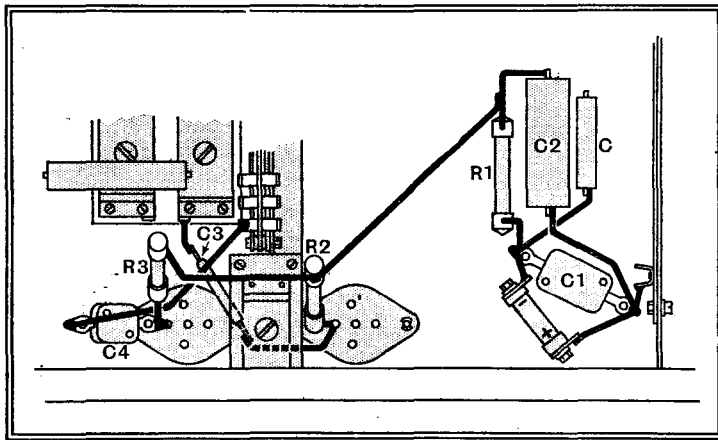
This drawing shows more clearly than the photographs the connections to the controlled valves.
